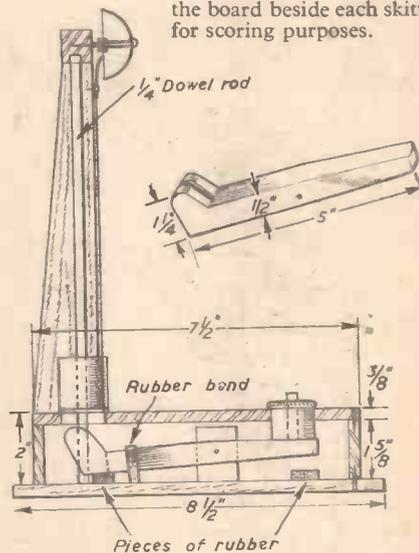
Section through the base of the "Nokitup" game and details of the striker trigger.
